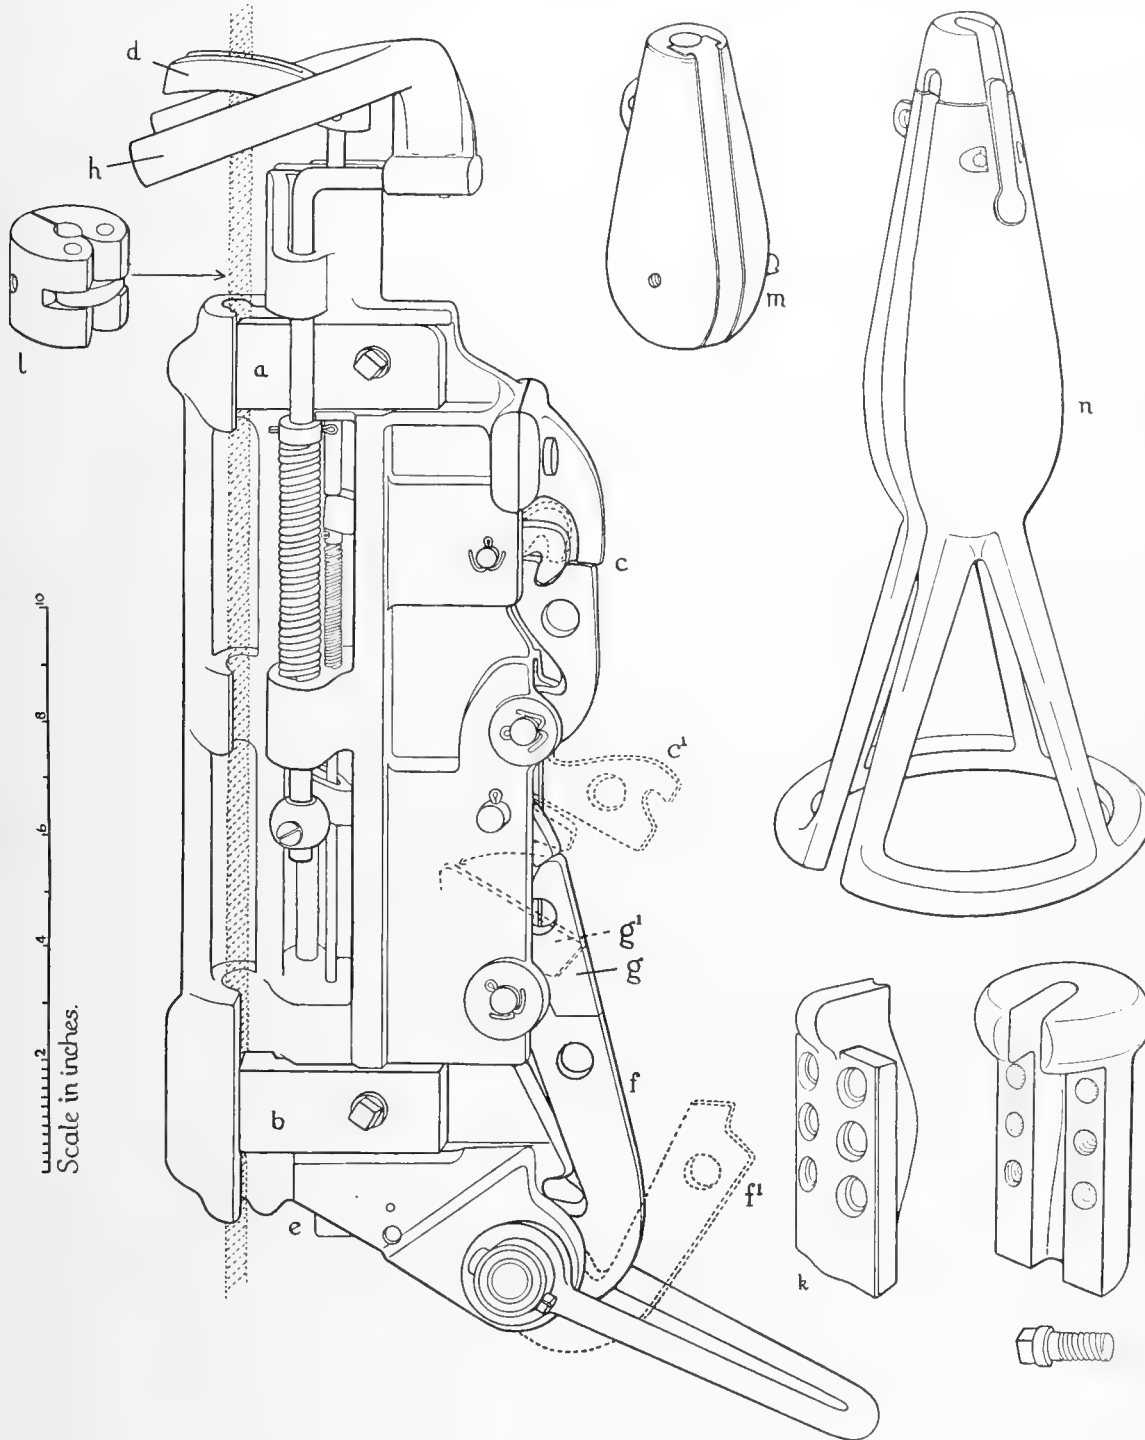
Opening and closing mechanism for large horizontal nets: for explanation see text.
